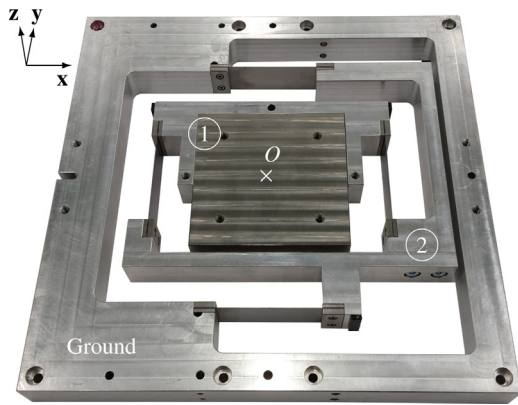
Simple 2-DOF parallel spring stage prototype. Frame dimensions  $220 \times 220 \text{ mm}^2$ .
